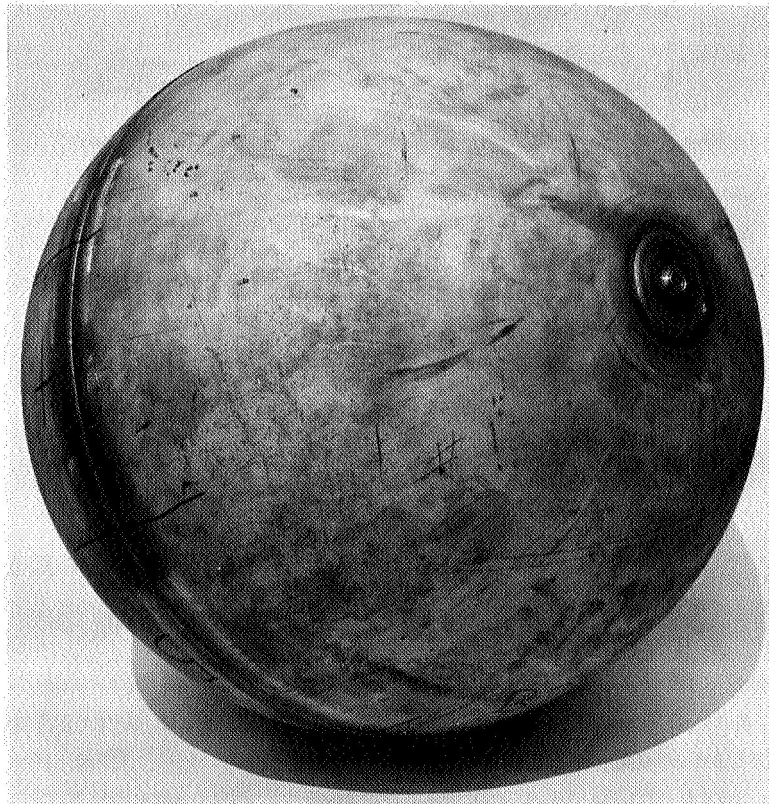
HELIUM TANK, 27-1/2 INCHES IN DIAMETER, PRODUCED BY WELDING TOGETHER TWO HYDROSPUN HEMISPHERICAL TANK HEADS OF 17-7 PH STAINLESS STEEL
